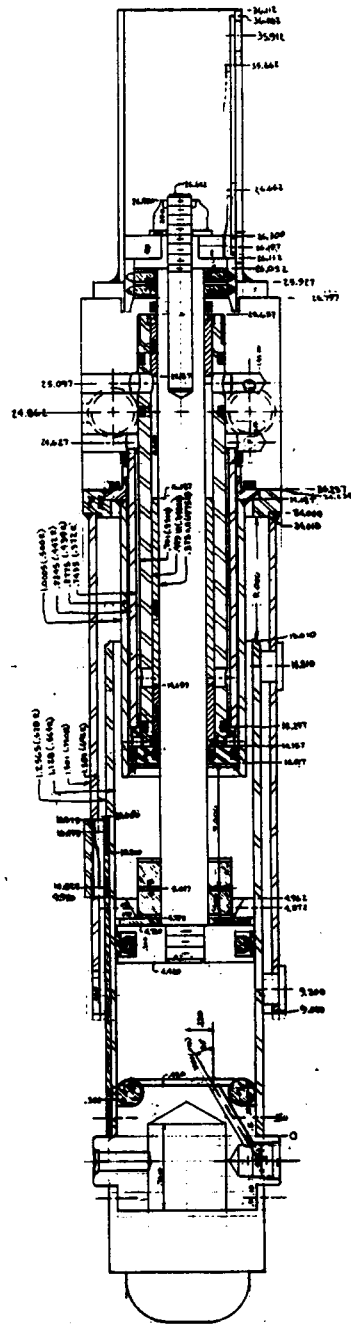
Engineering drawing of the hydraulic-pneumatic leg, showing details of the hydraulic actuator, air spring and position sensors. Leg is shown compacted in the axial direction.
